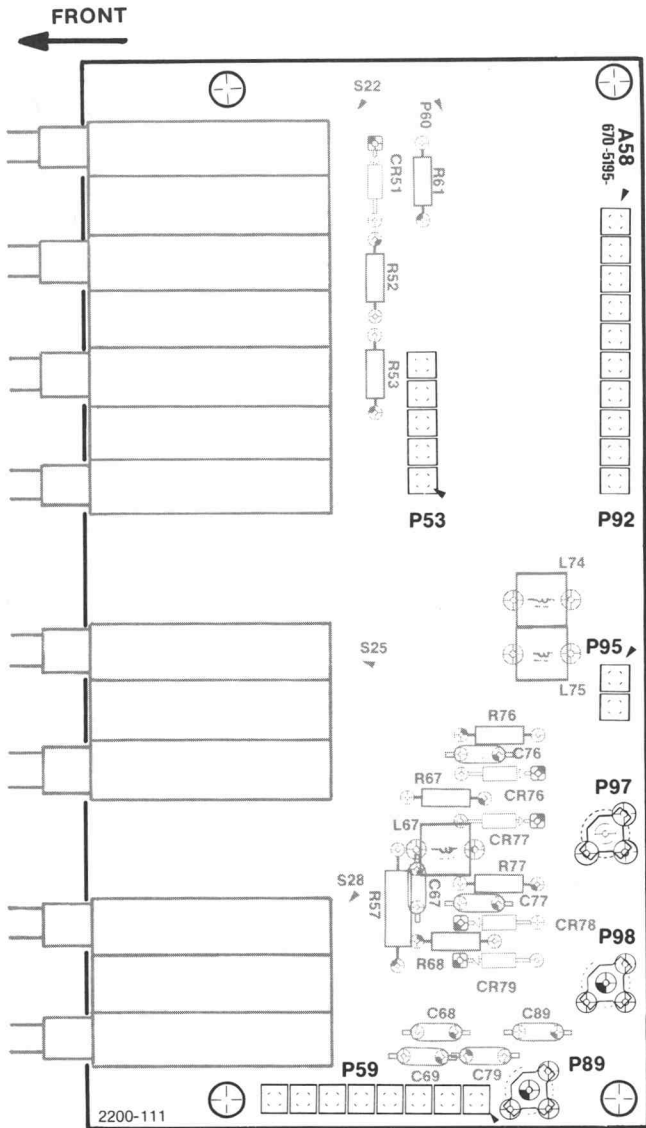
Replacing the Phase Lock Switch Board, A58.
